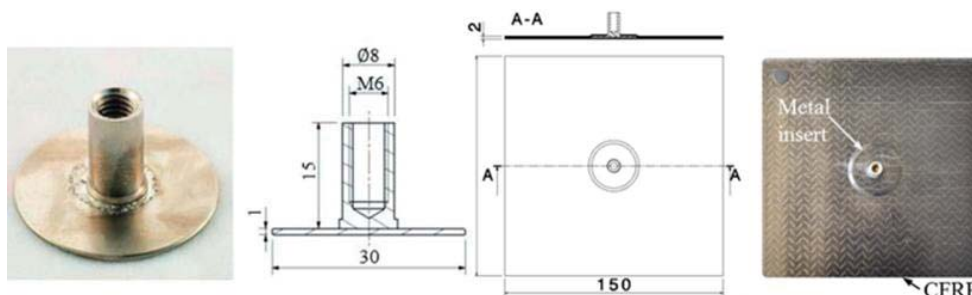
Exemplary picture and dimensions of the metal insert and CFRP specimen
